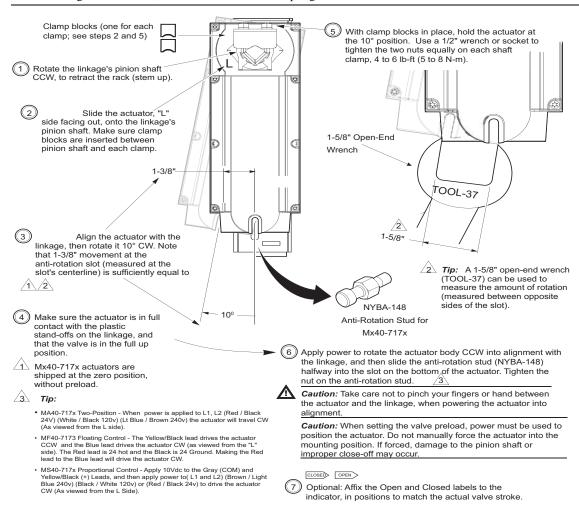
Mounting Mx40-717x and Setting Up Actuator/Linkage/Valve
